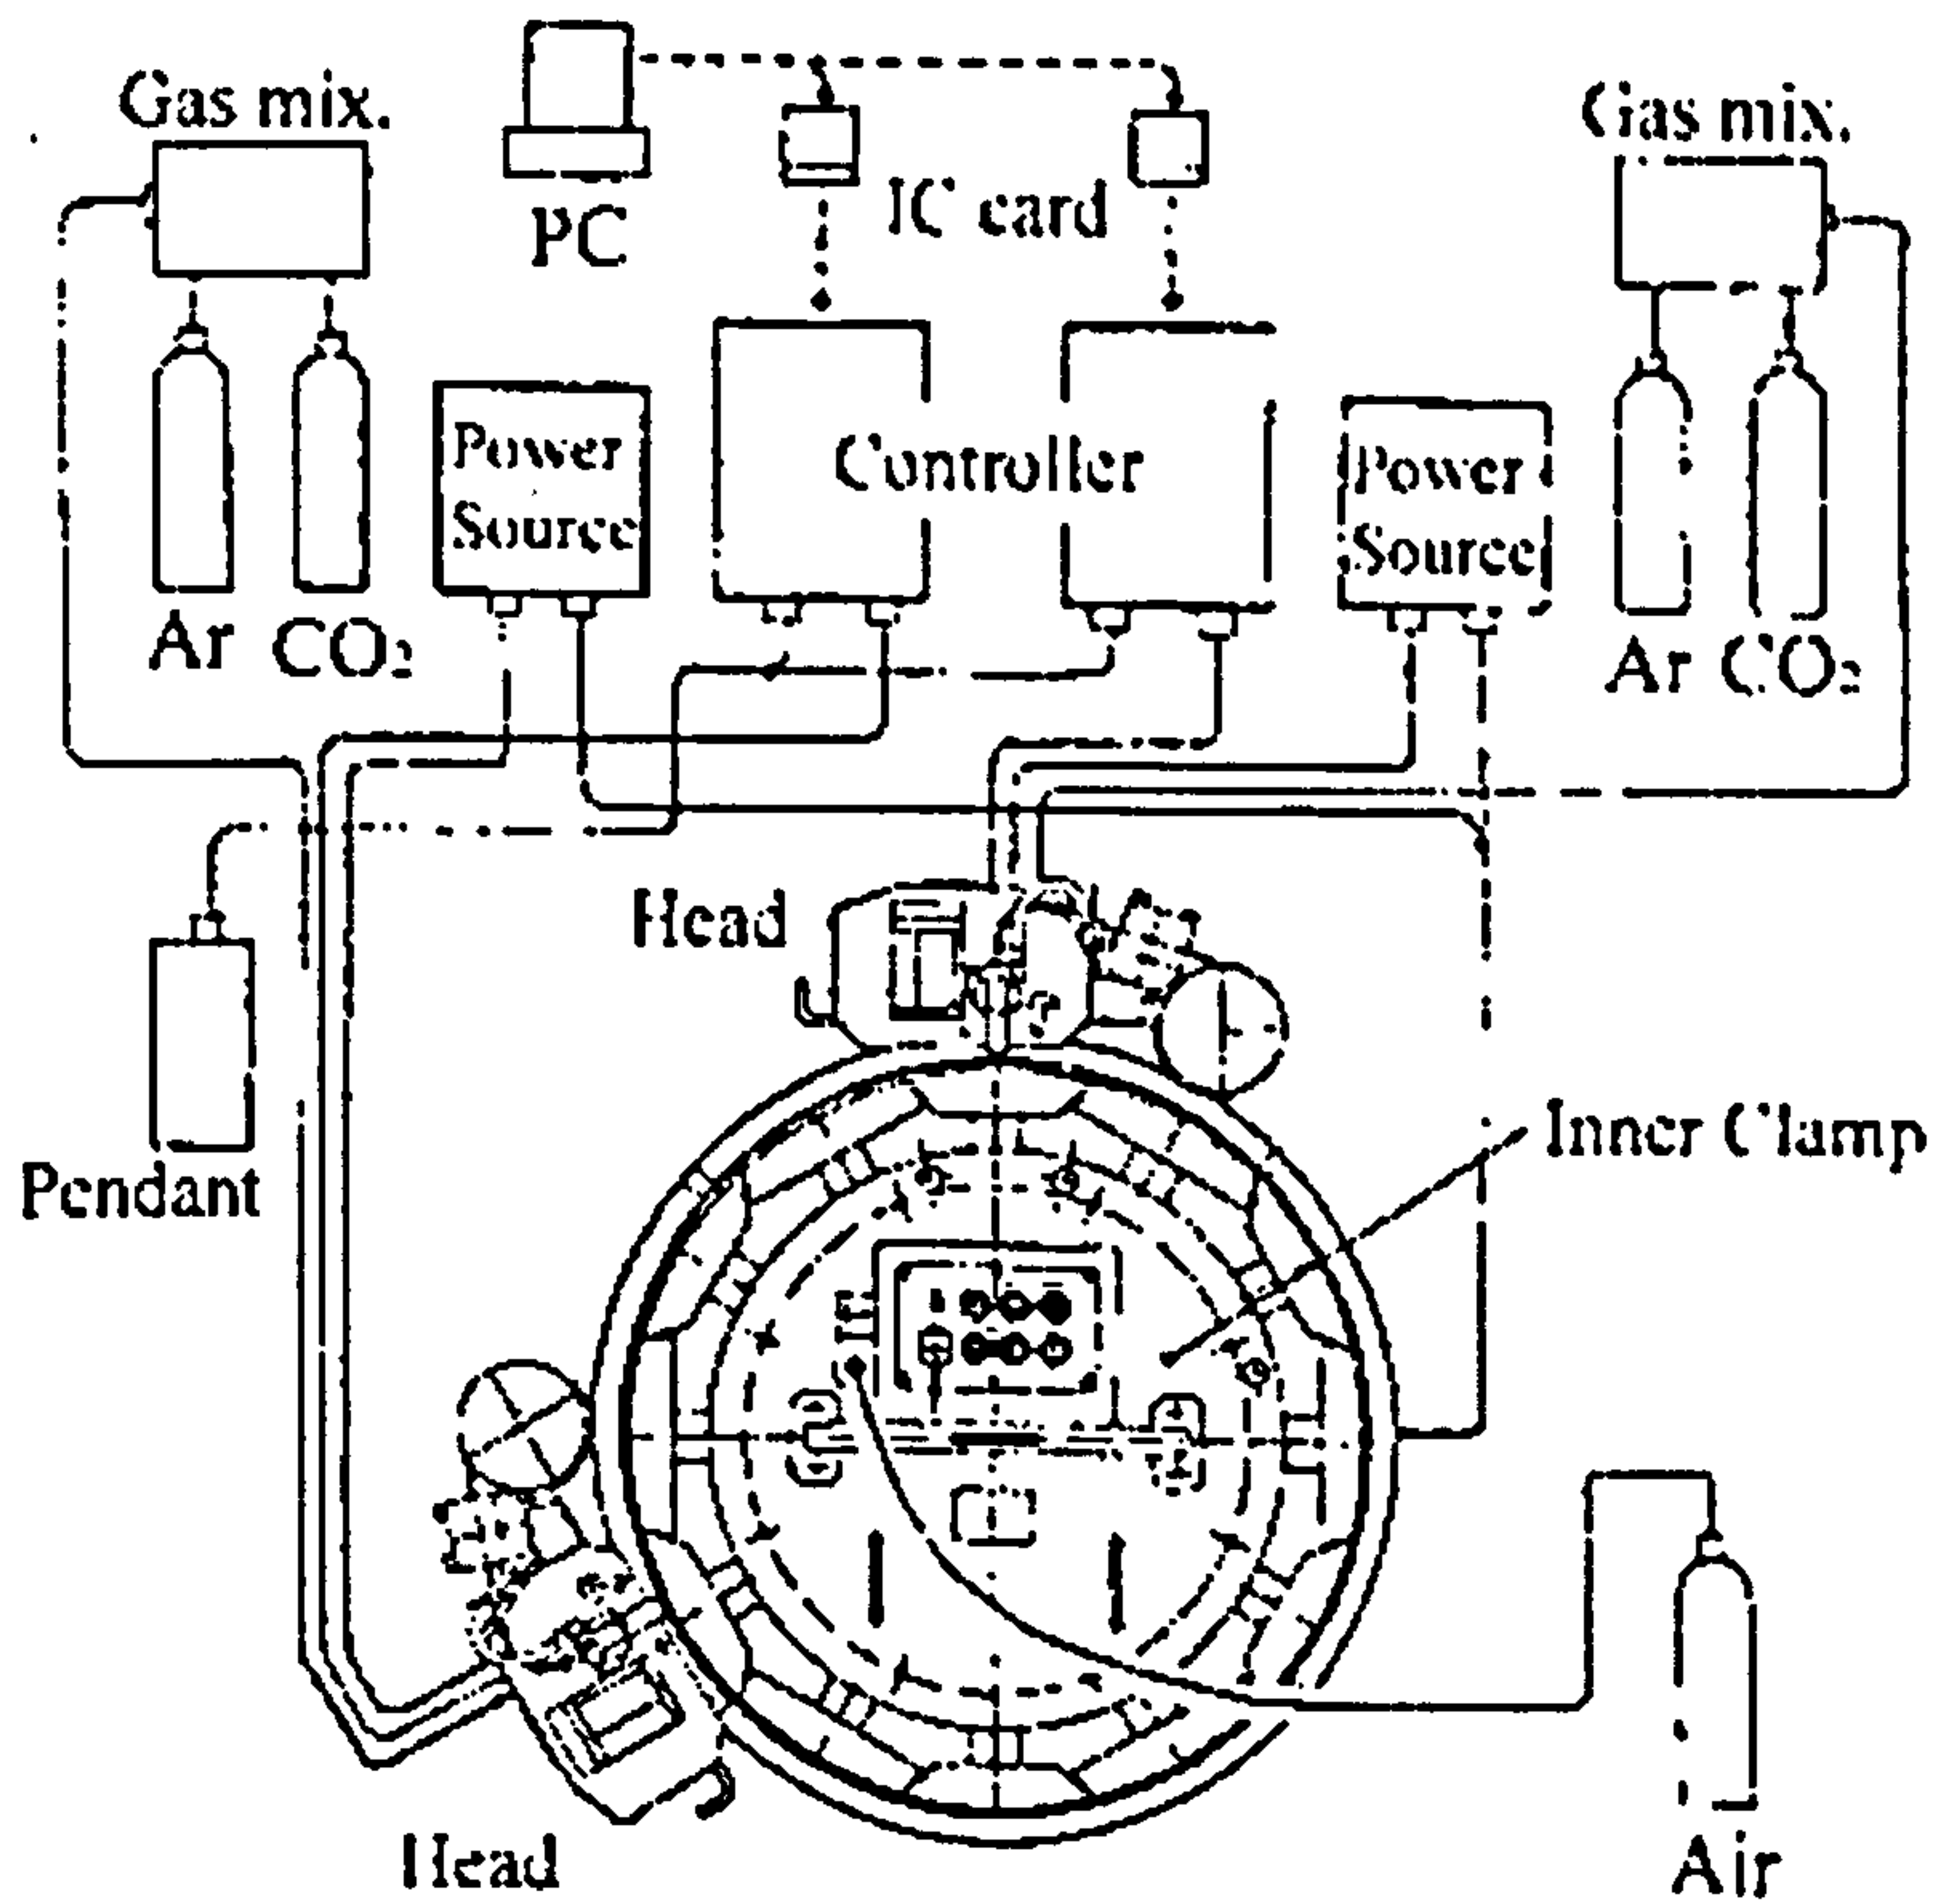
Typical mechanised main line pipewelding system showing an internal clamp and external welding bugs (after ref. 105)
